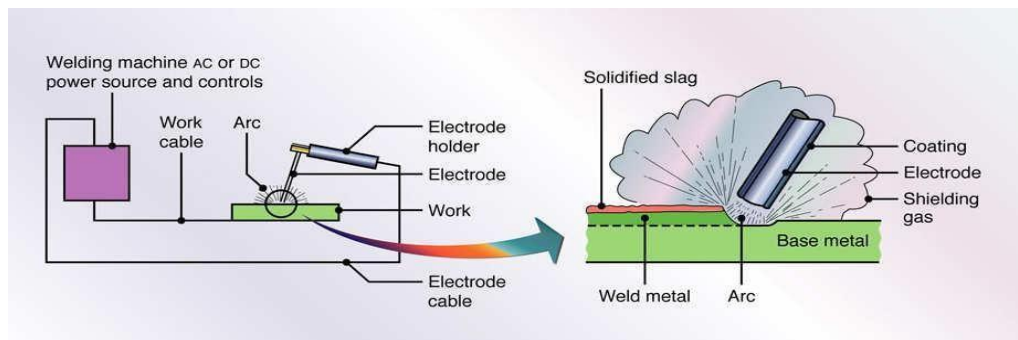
Schematic illustration of shielded metal arc welding
